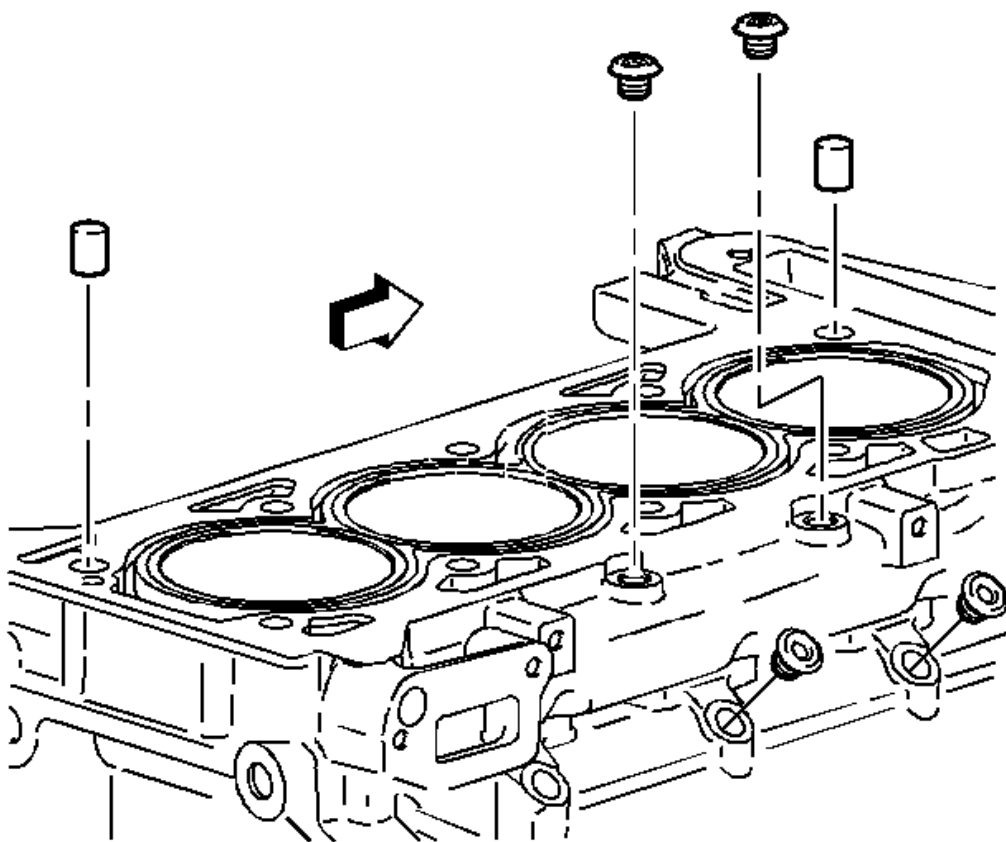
View Of Oil Passage Plug, Oil Flow Check Valve & Water Jacket Drain Plug
